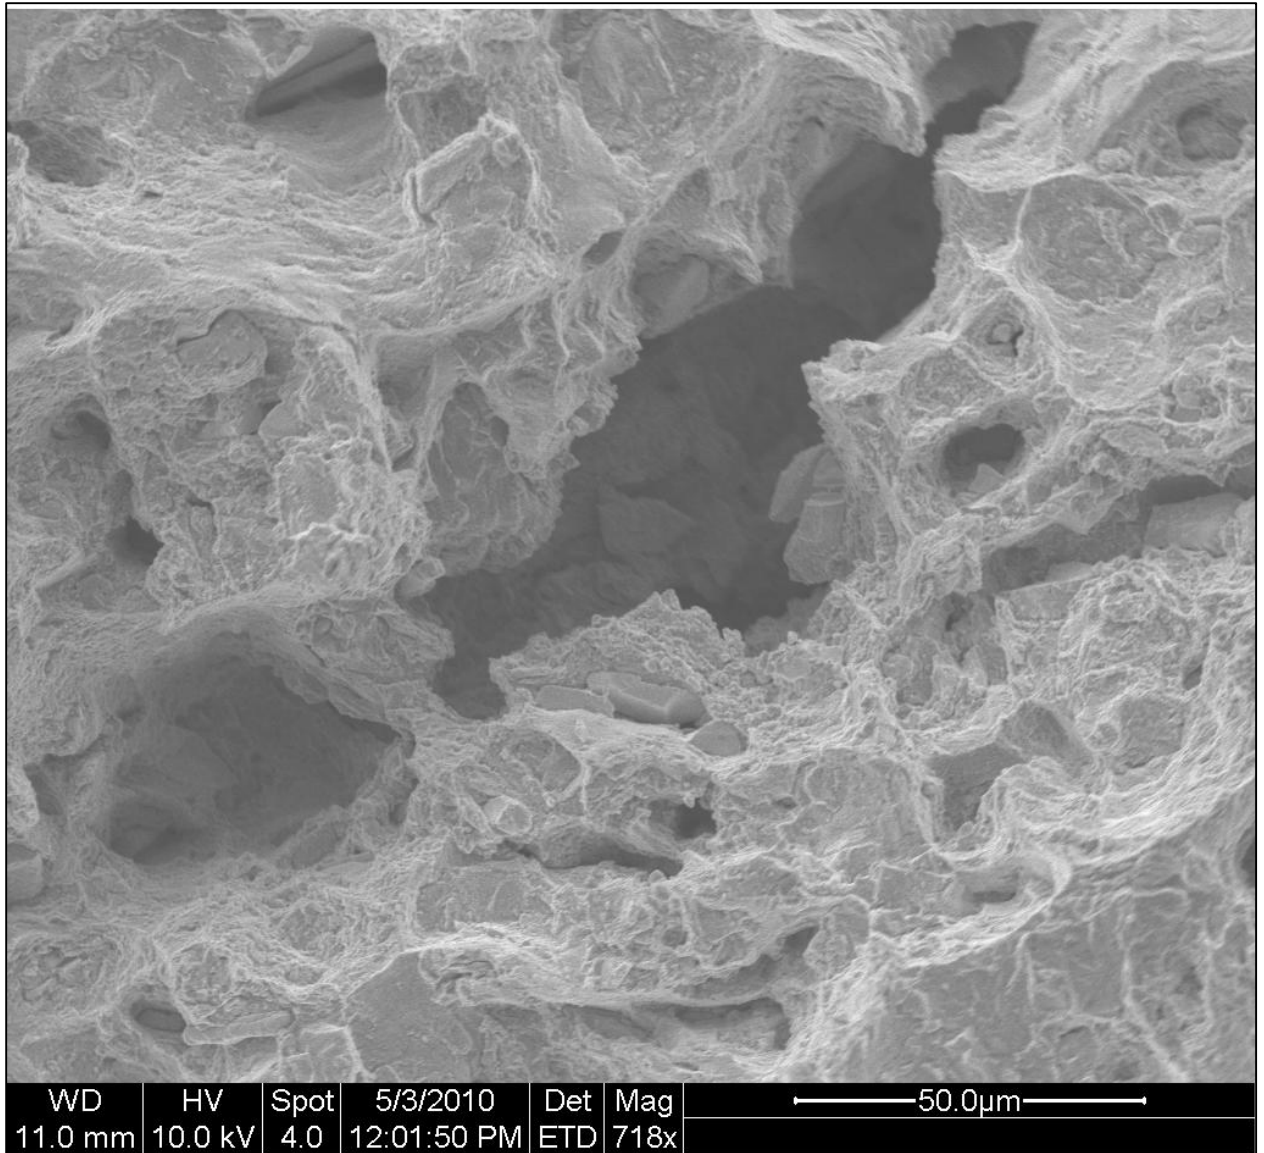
Haynes 230 on-cooling 2046 fracture surface. The visible void is much larger than the areas where cup and cone failure has occurred. Inward projections are seen at the image top right.
